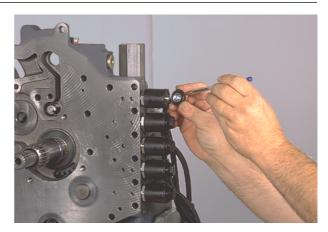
Remove solenoid valve cartridge retainer nut and "O"-ring.
